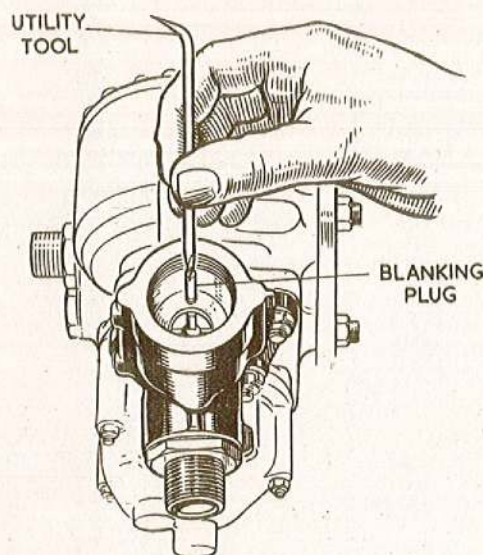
Locally made tool for tightening blanking plug in reducing valve body
